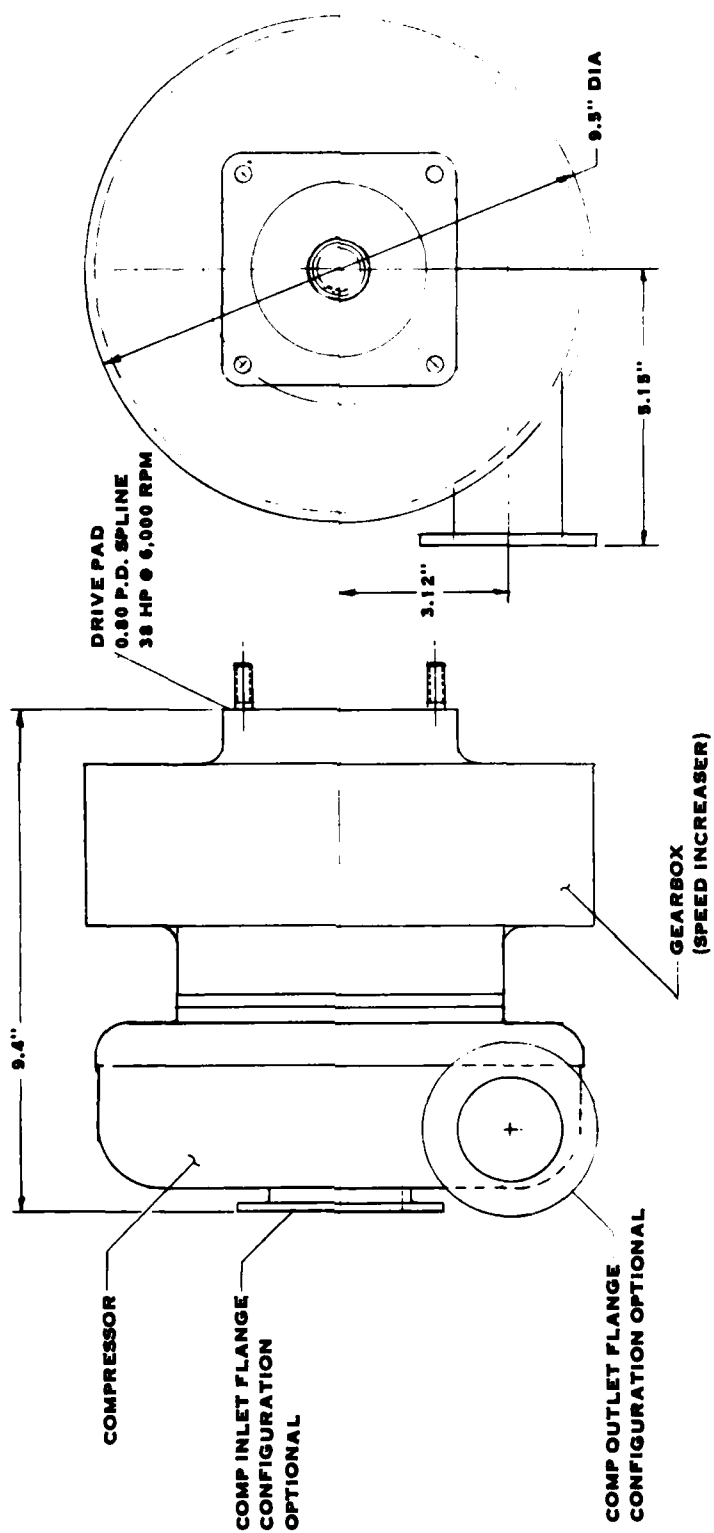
DRIVE COMPRESSOR AND GEARBOX INSTALLATION
